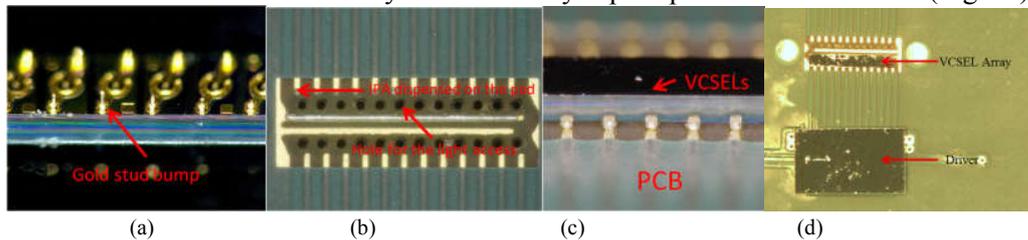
(a) Stub bumps on VCSEL array; (b) Dispense the ICA epoxy H20E on PCB. (c) Flip-chip bonded VCSEL array on PCB. (d) Assembled broadside coupled differential pair based optical transmitters;
